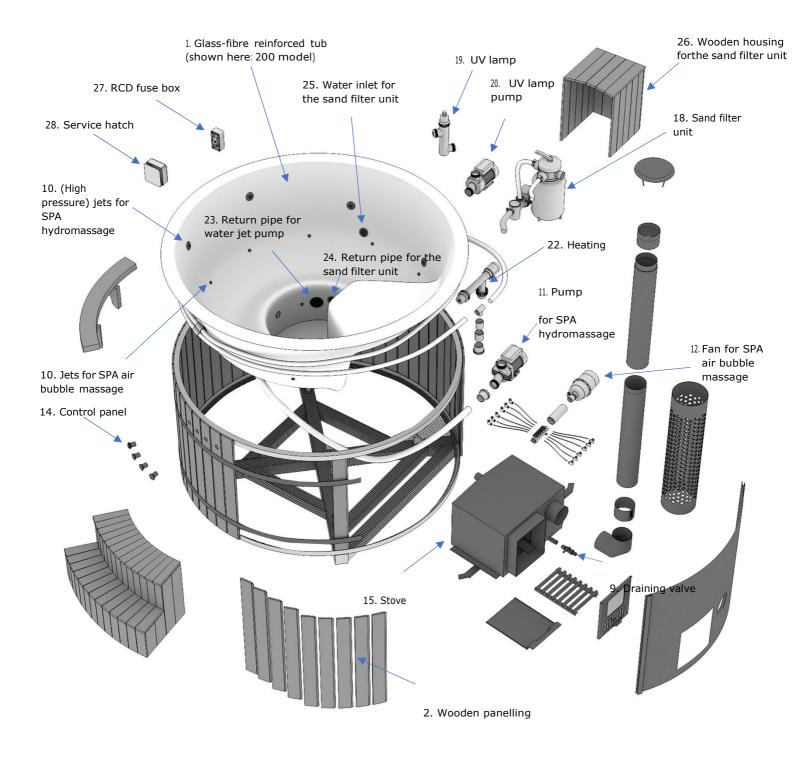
Exploded-view drawing of hot tub, "WELLNESS" model
